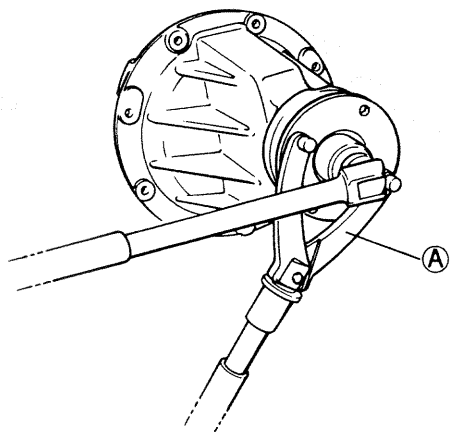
Ⓐ Special tool (Rotor holder 09930-40113)
